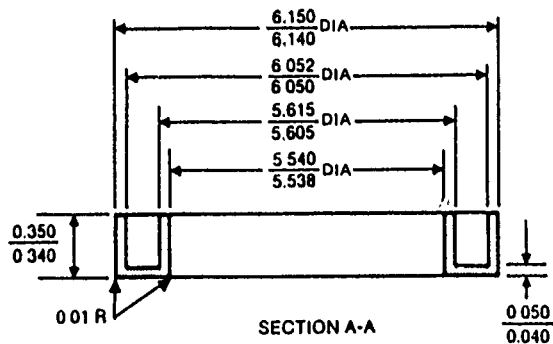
Titanium End Cap Ring for Protection of Ceramic Bearing Surfaces Against Contact with Metallic End Closure or Joint Stiffeners. The Cap Is Filled with Epoxy Resin Prior to Placing It Over the End of Ceramic Cylinder.
